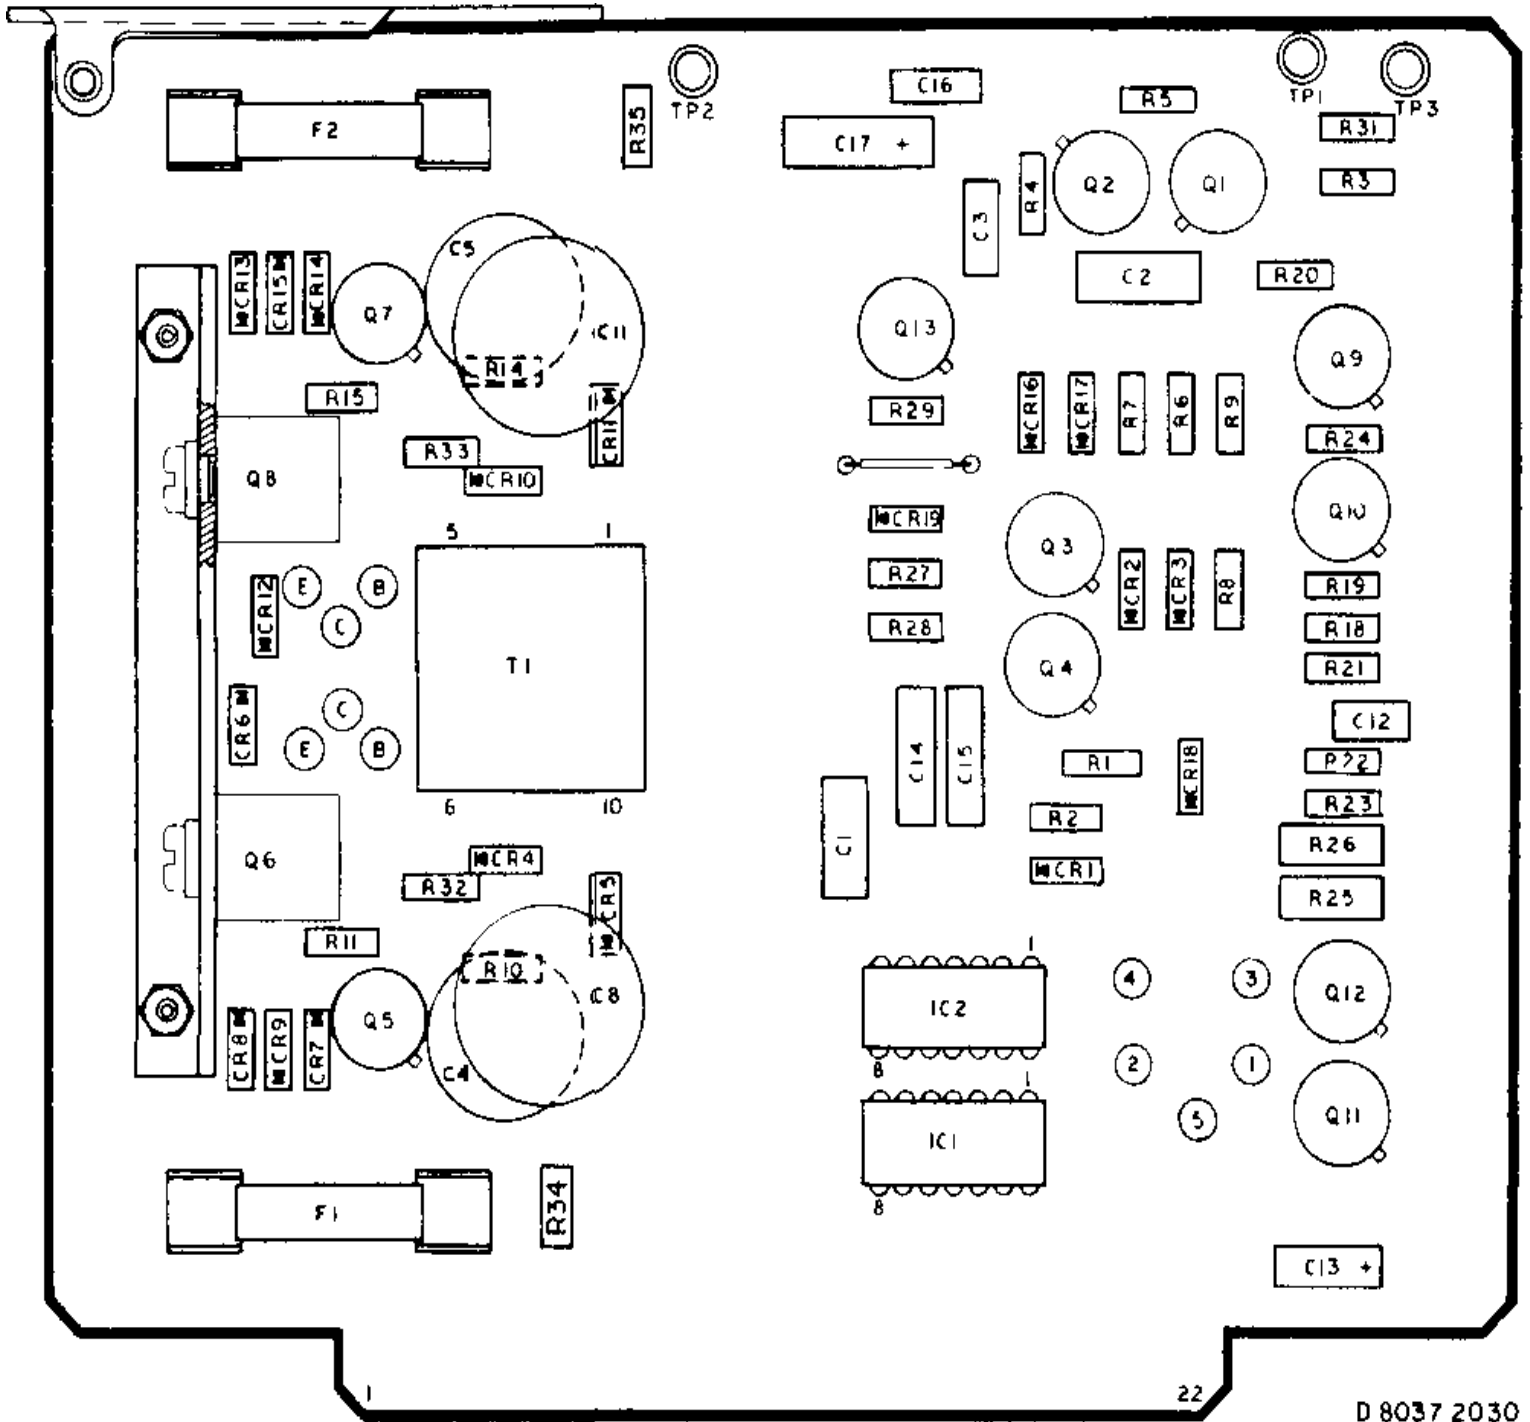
Component Locations - Data Output Circuits, Assembly A3
